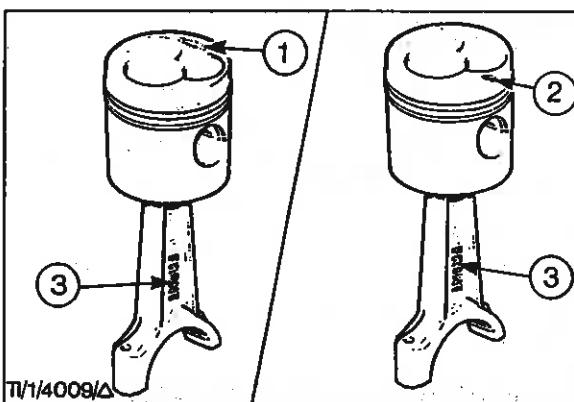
Piston and Connecting Rod 'Fitting' Marks (Towards Front of Engine)
